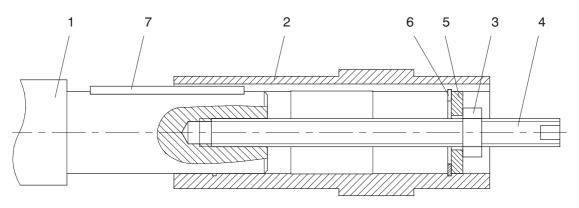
Mounting hollow shaft and parallel key
